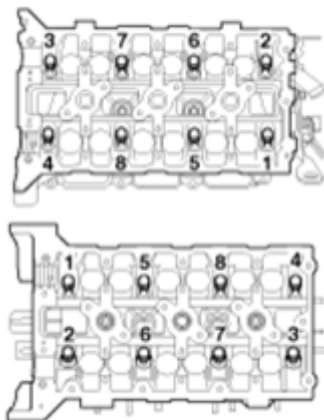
Identifying Cylinder Head Bolts Removing Sequence
